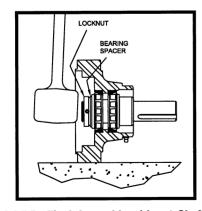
Final Assembly of Input Shaft Housing
